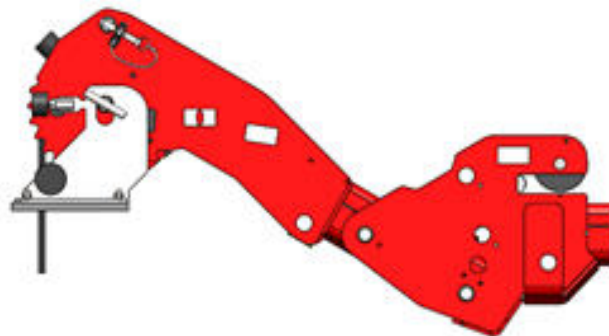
Attachment of winch head or manual jib extension to adjustable section
